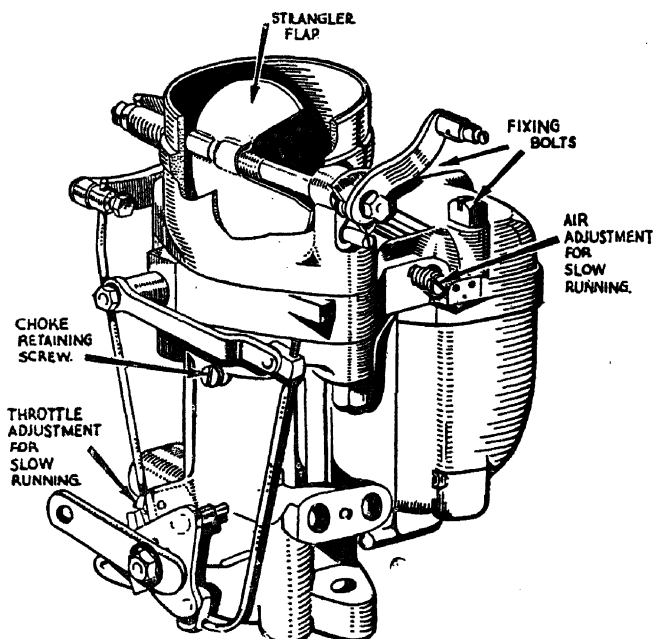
External View of Zenith 36 VEI Carburettor.
